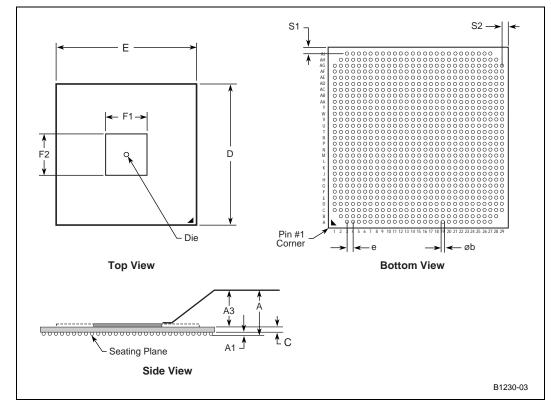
Intel[®] 80331 I/O Processor 829-Ball FCBGA Package Diagram
